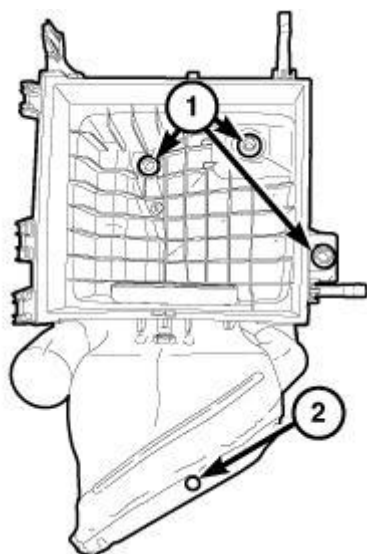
Air Cleaner Housing Rubber Grommets & Push Pin Retainer
